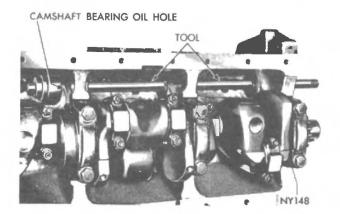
Removing and installing camshaft bearings (Tool C-3212A).
